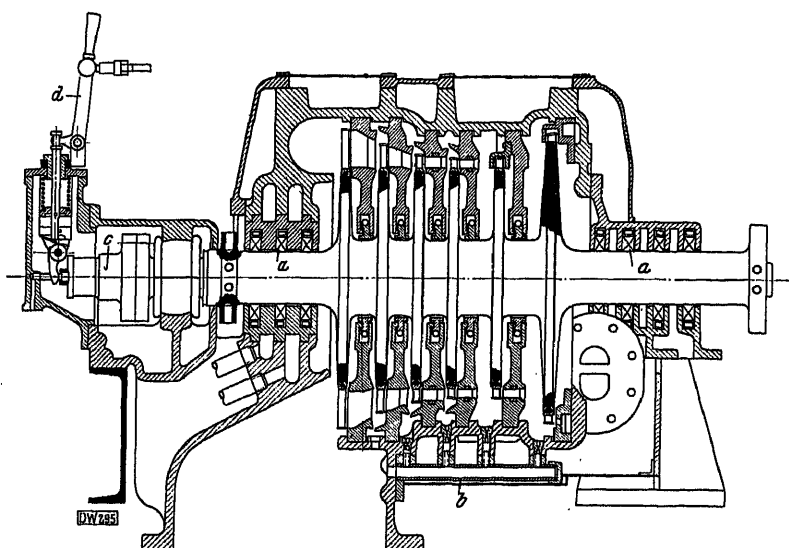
Amer. G.E.C., 250 kw., 10,000 R.P.M., geared high-pressure turbine
